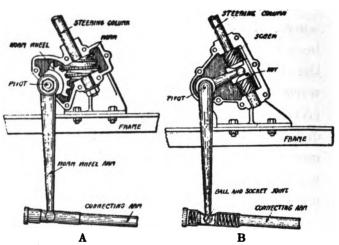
Steering Mechanisms. A, worm and wormwheel steering gear; B, nut and screw steering gear.
